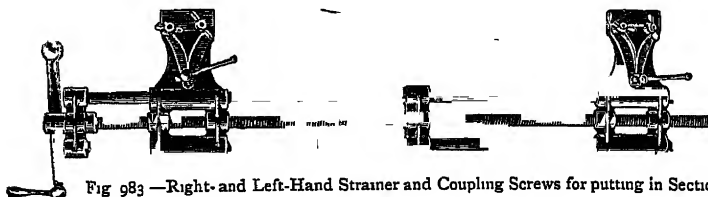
Right- and Left-Hand Strainer and Coupling Screws for putting in Section Insulators
